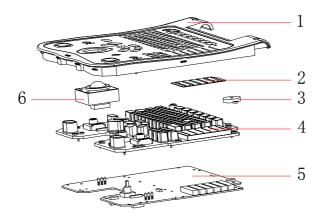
The exploded drawing (2) of the keyboard assembly
